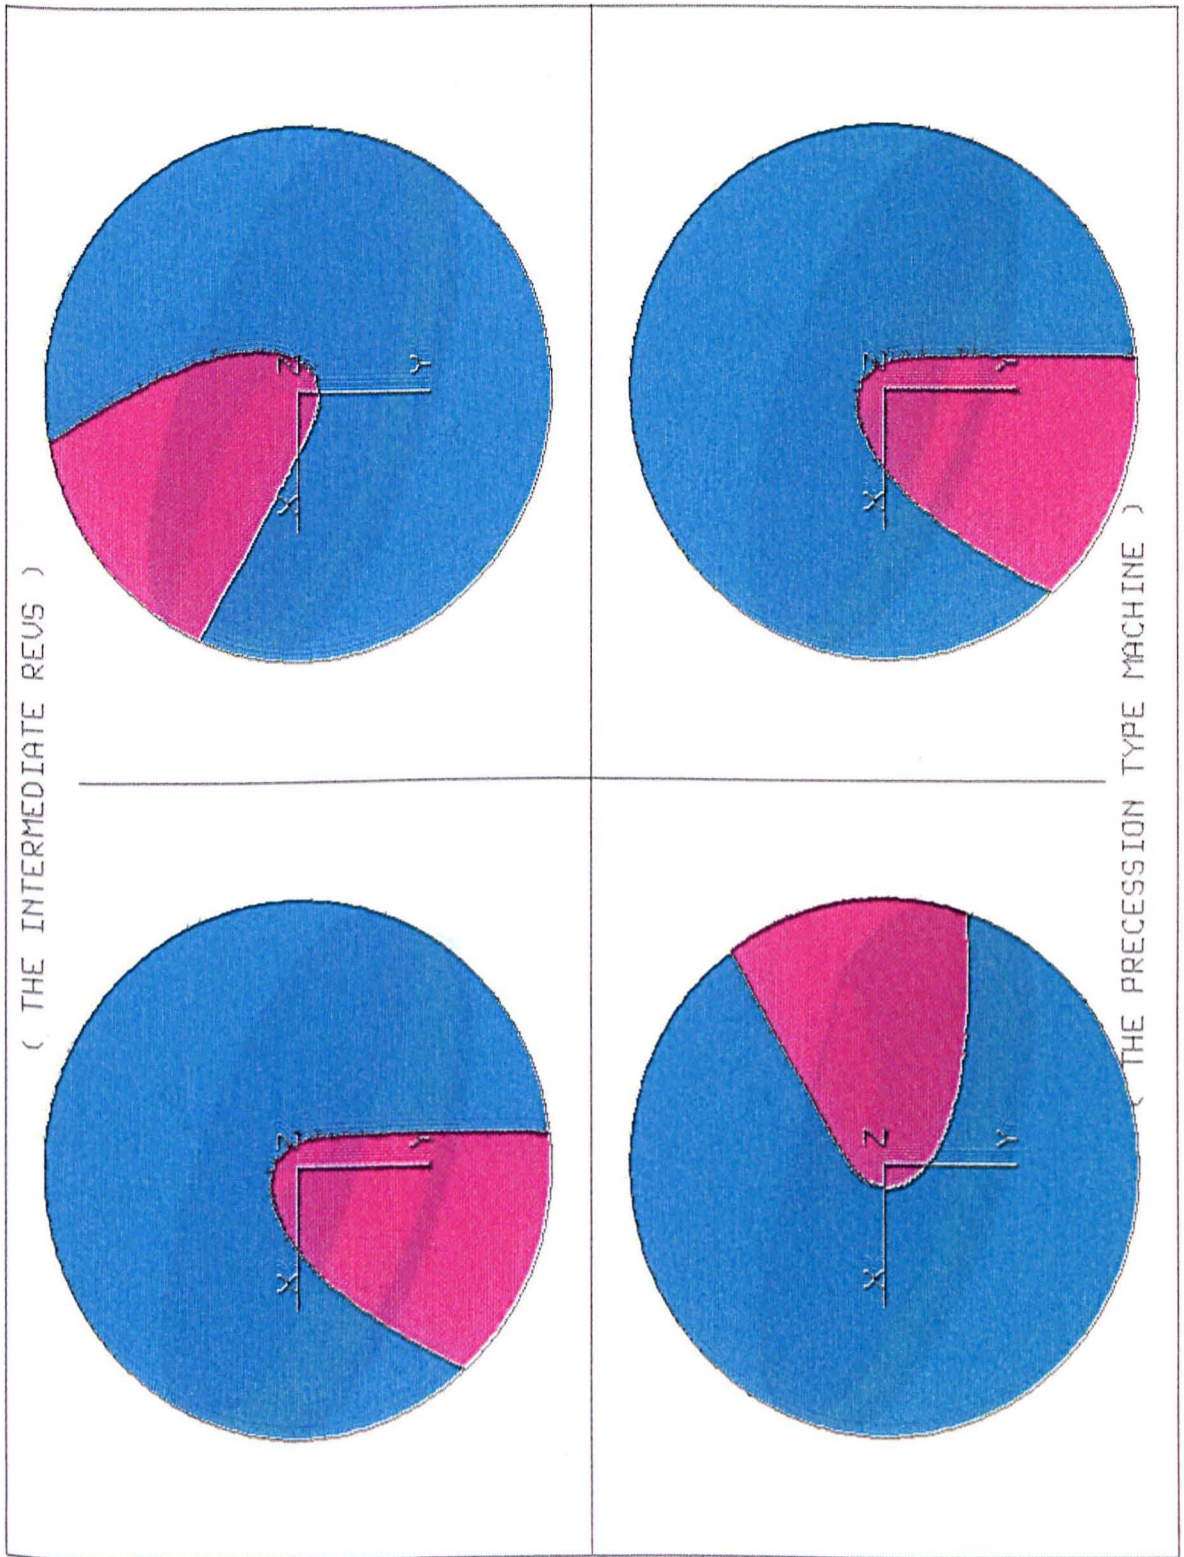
Surface illustration of a workpiece being deformed by an imaginary inclined tool
